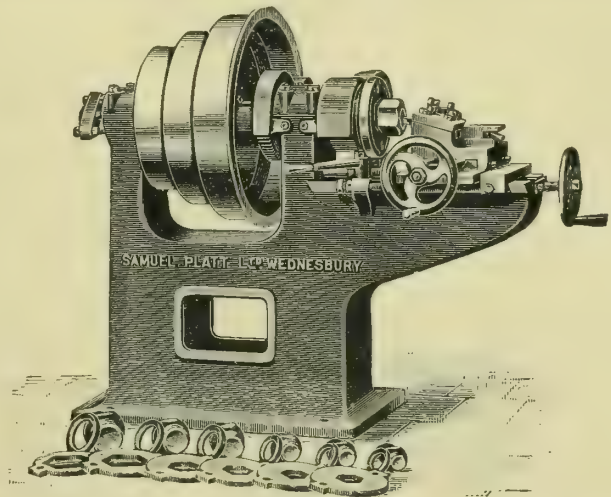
NUT-FACING AND CHAMFERING MACHINE. MESSRS. SAMUEL PLATT, LTD., WEDNESBURY.
